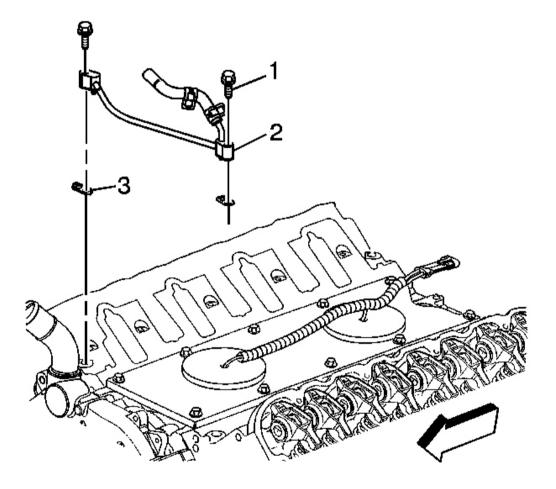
Coolant Air Bleed Pipe & Gaskets Courtesy of GENERAL MOTORS CORP.
